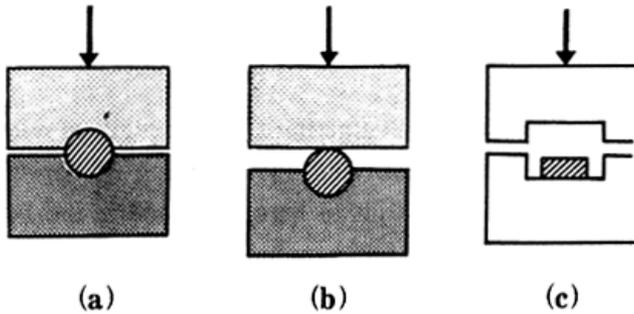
Combinations of test pieces and test machine contact surfaces
